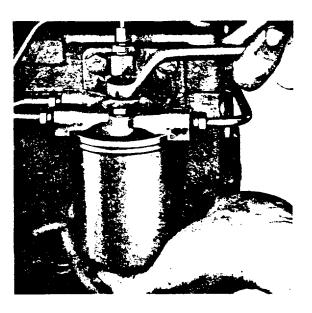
Removing the Fuel Filter Bowl Securing Bolt. (Earlier Type)
